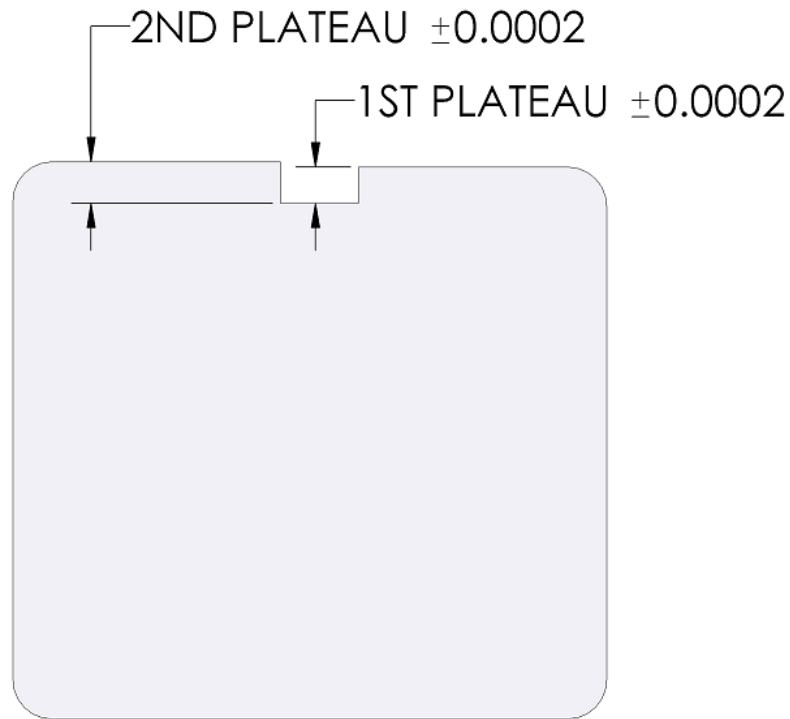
Buttress Height Gauge Setting Standard (1 in. TPF Buttress Thread Height Standard)
